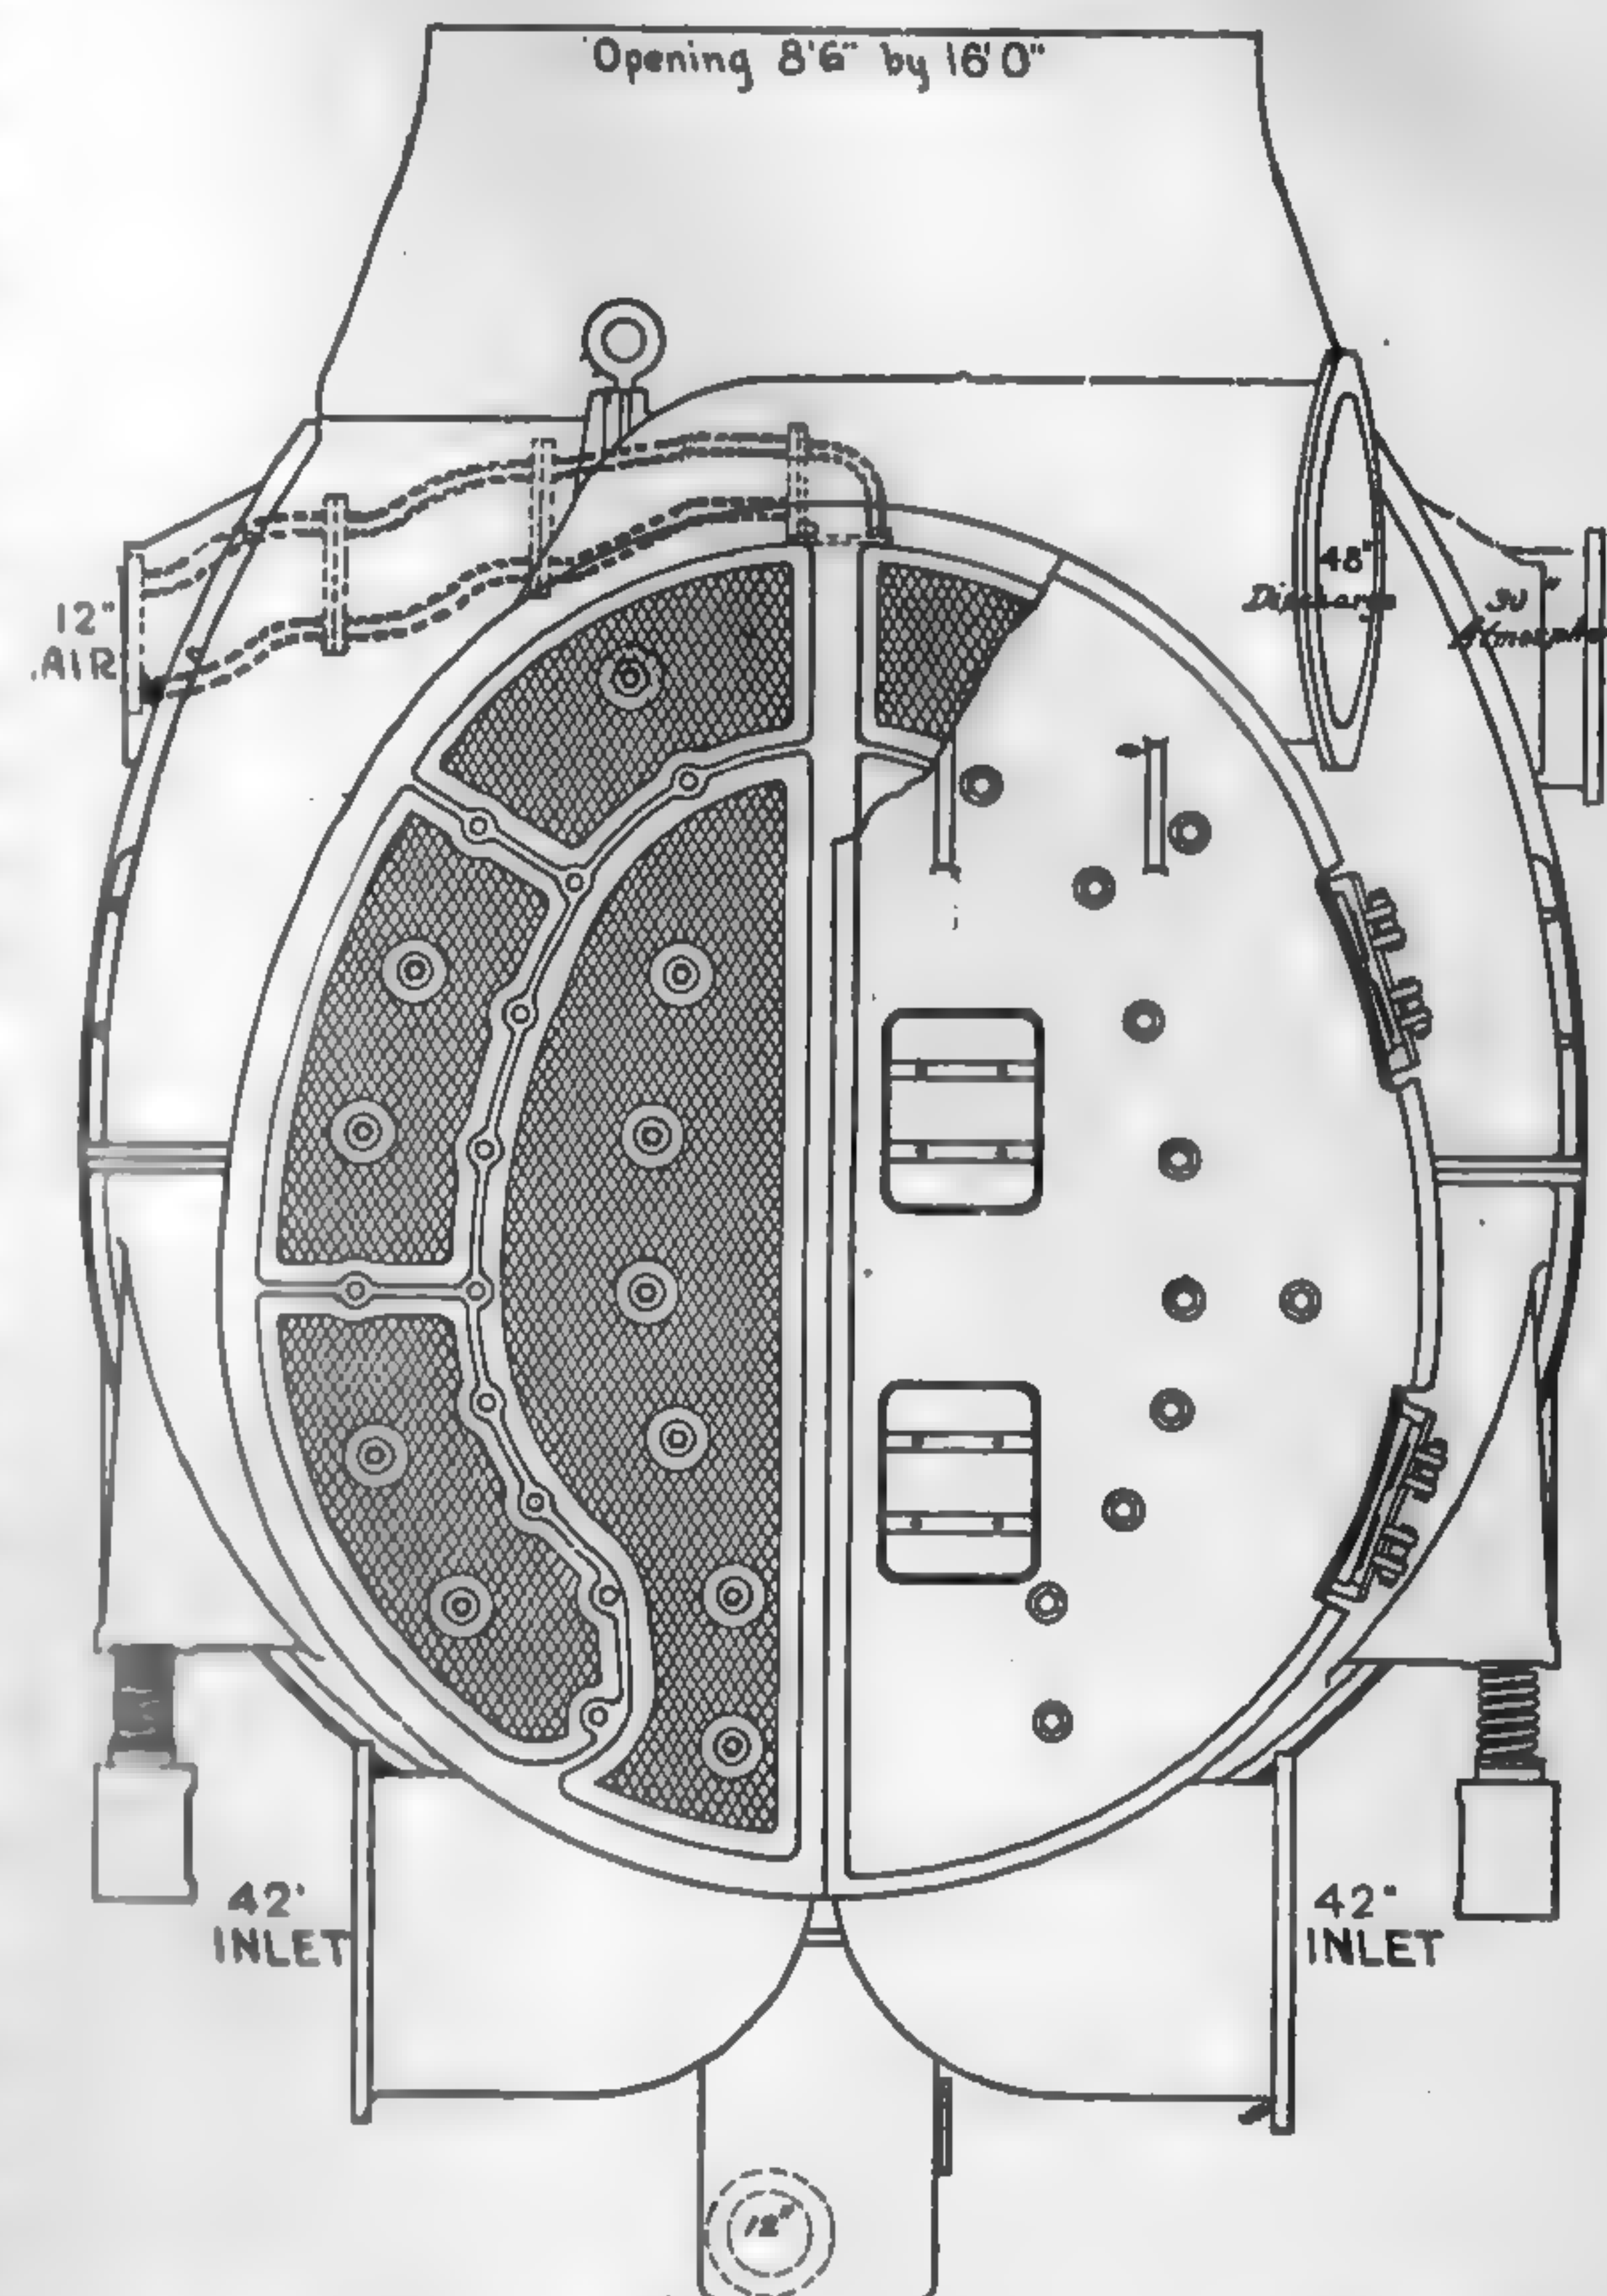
Tube Sheet — 50,000 sq. ft. Westinghouse Surface Condenser.
